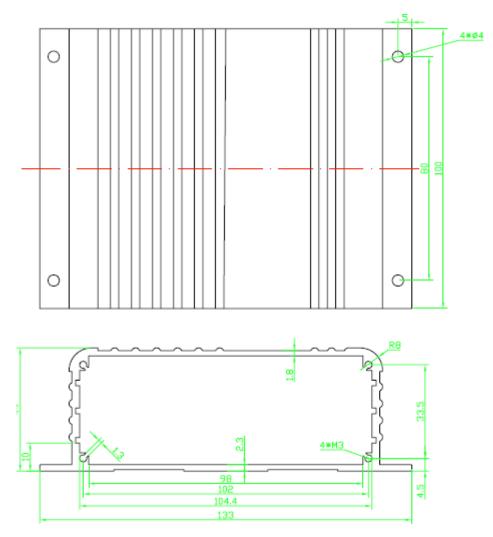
External dimensions of the KY-EXT6G enclosure box
